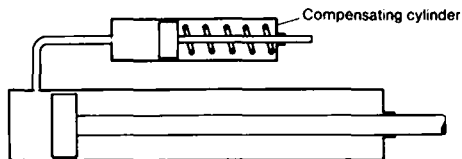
Recoil brake with fluid compensating cylinder (schematic drawing).
